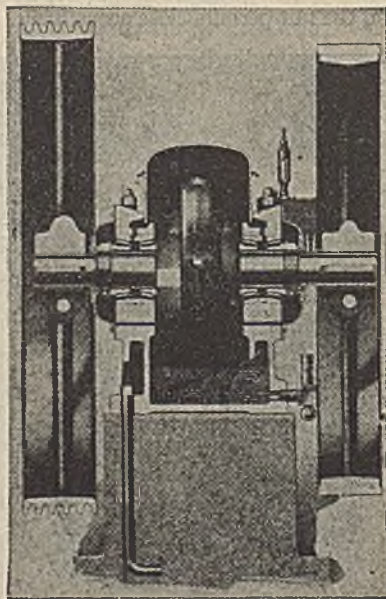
Large compressor main bearing. Bearing adjustments are made by means of a slow taper wedge moved by pull bolts and locked by jack screws outside the bearing cap. The bearing permits additional adjustments in all directions.
